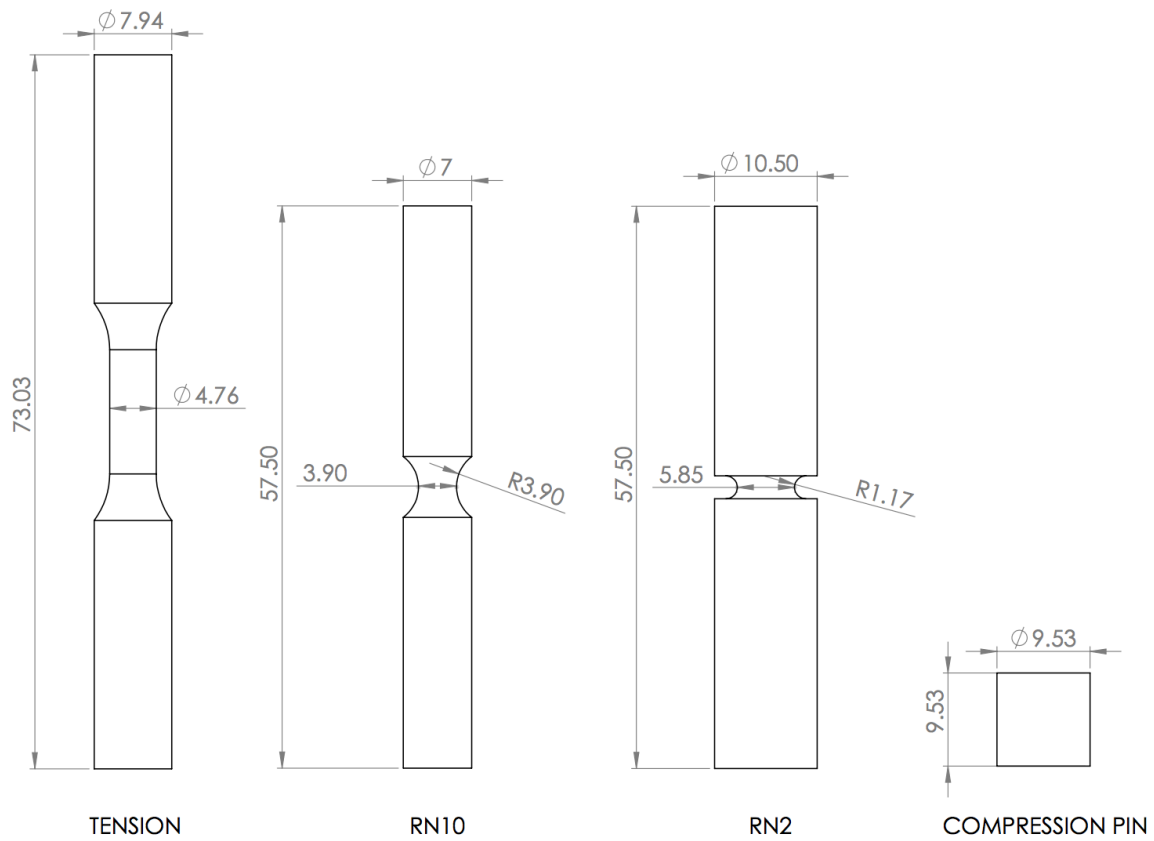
Drawings of bulk specimens. These specimens were machined from a cast plate of PA-6. From left to right, a cylindrical bar (or smooth round bar), an RN10 bar, an RN2 bar, and a cylindrical compression pin. Dimensions are in mm.
